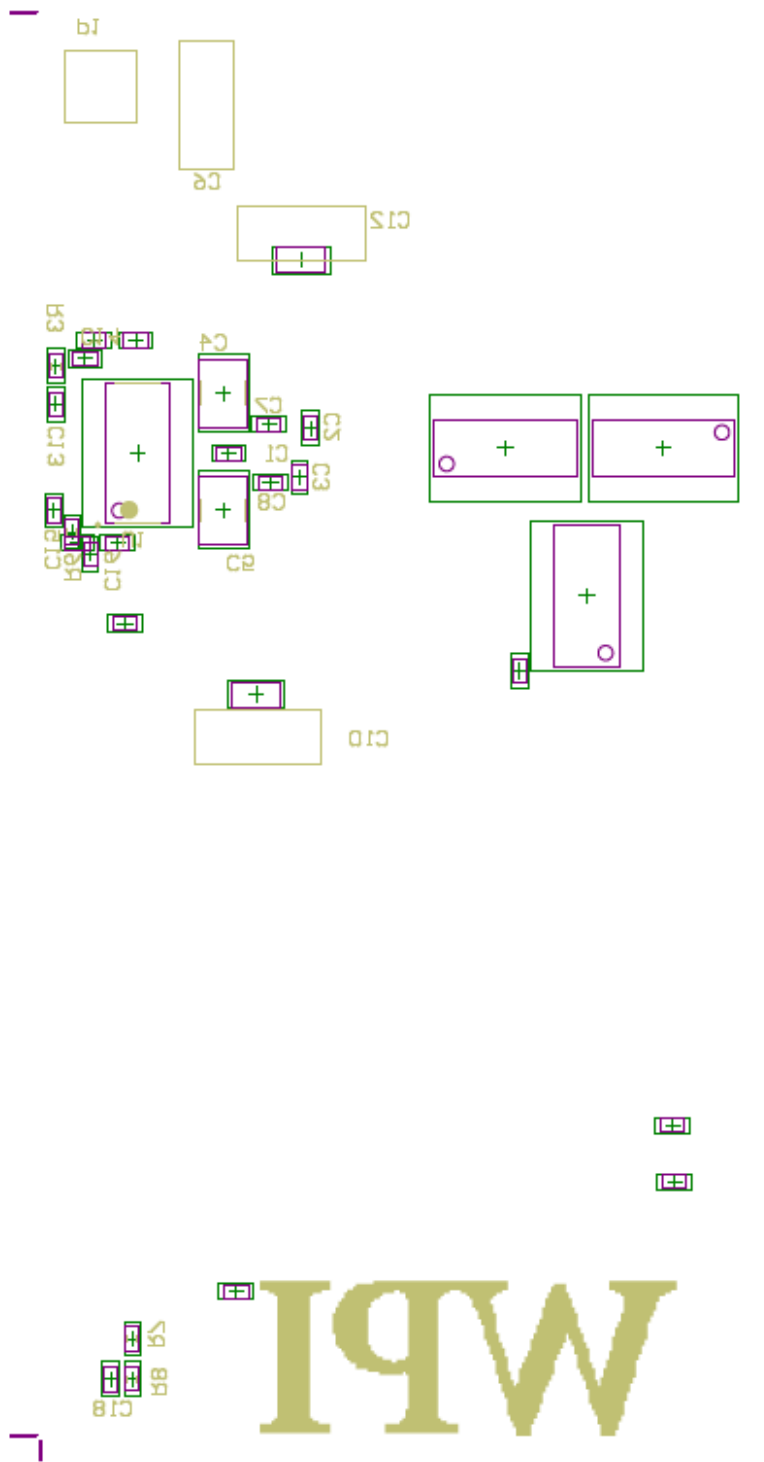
Prototype Rover Shield PCB - Bottom Silk Screen
